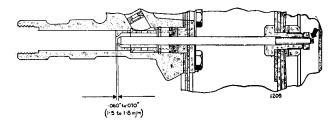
When assembled there must be .060" to .070" (1.5 to 1.8 mm.) clearance between the end of the push-rod and the piston. The clearance is adjusted by means of a screwdriver at the point indicated by the arrow.
